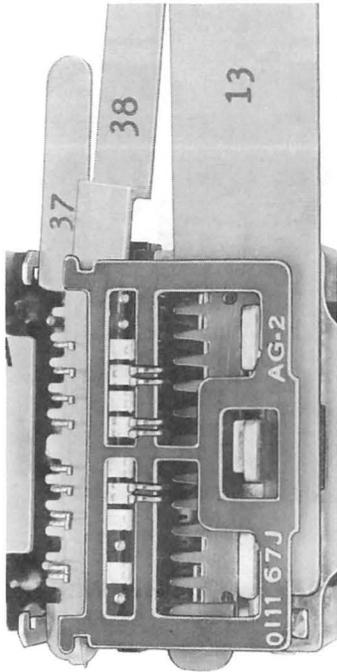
Detail 37 Comb in Place With Detail 36 Lifter
